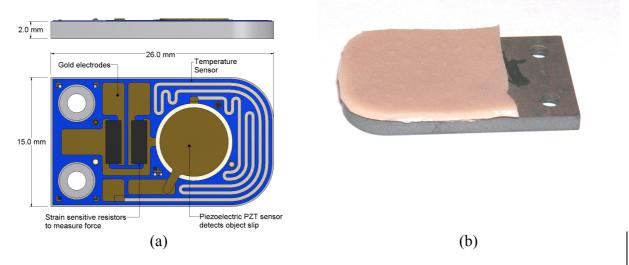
(a) Drawing of the finger tip sensor using a stainless steel type 430 substrate (b) Photograph showing the back of the sensor with cosmesis covering
